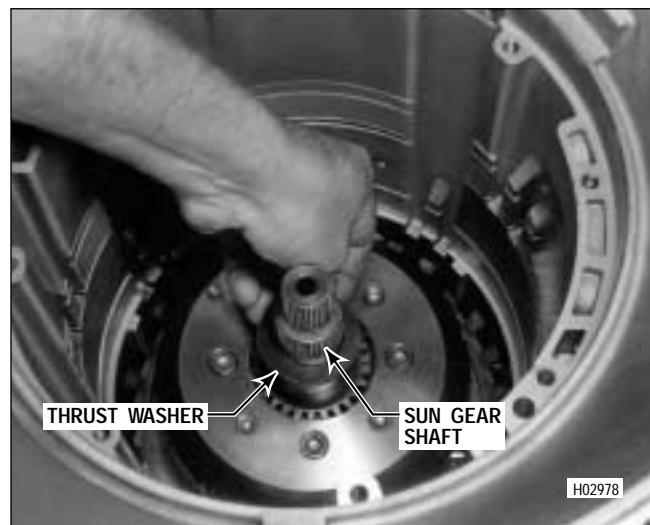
Installing Sun Gear Shaft Assembly and Thrust Washer
